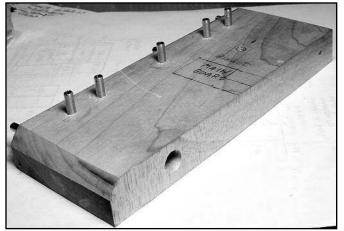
The side board showing the main board outline and foot joint dowel socket.
